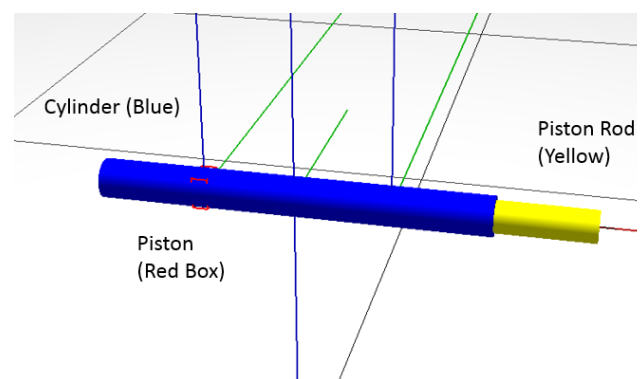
Geometric and kinematic model of a pneumatic cylinder.
